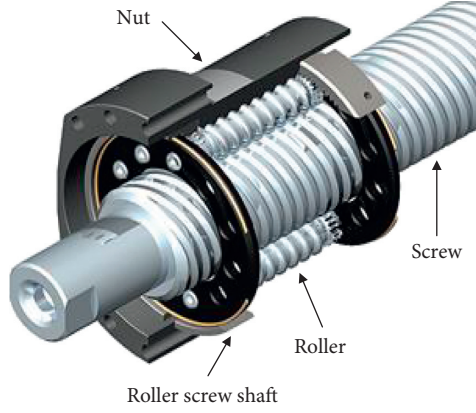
Planetary roller screw mechanism (PRSM) [6].
